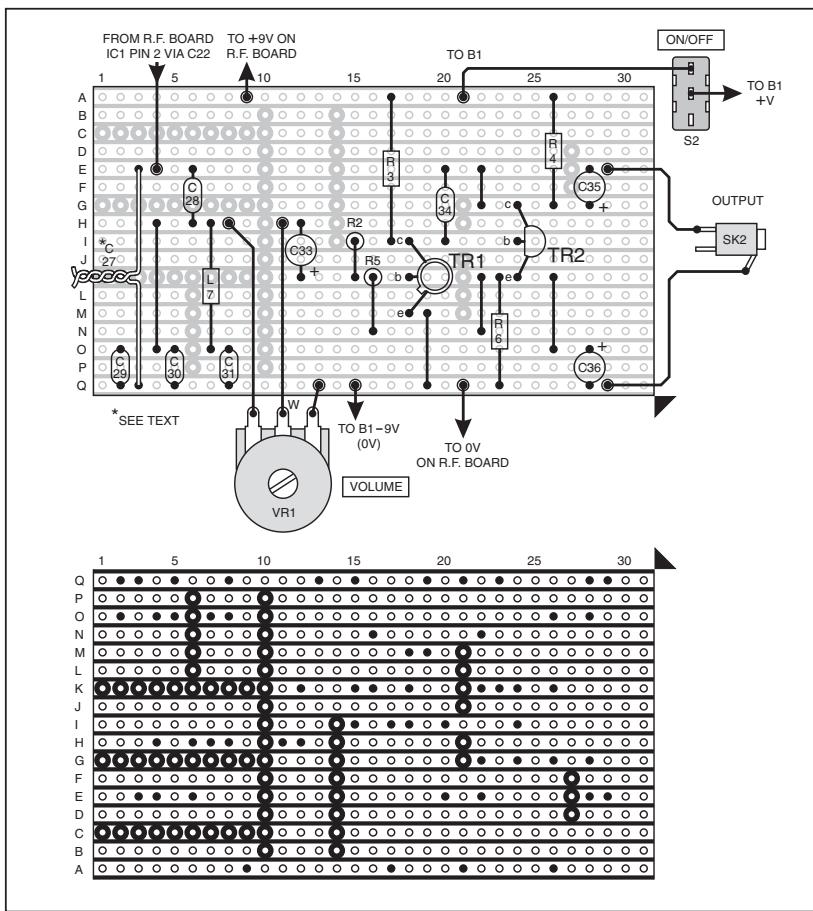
Audio/Filter circuit board component layout, interwiring to off-board components and details of breaks required in the copper tracks.
